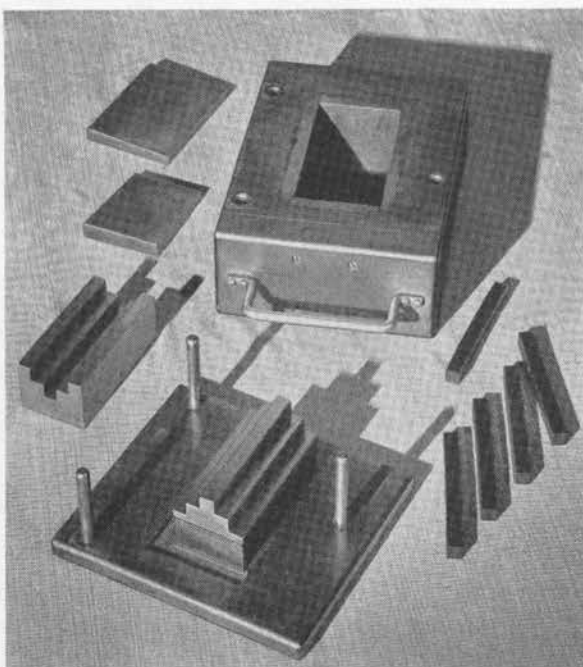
A mold with step-like pistons is used where a large number of test pieces of the type shown are required for experimental purposes
